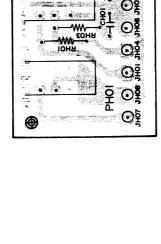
Muting Hi Filter Assembly(PH01 Component Locations
